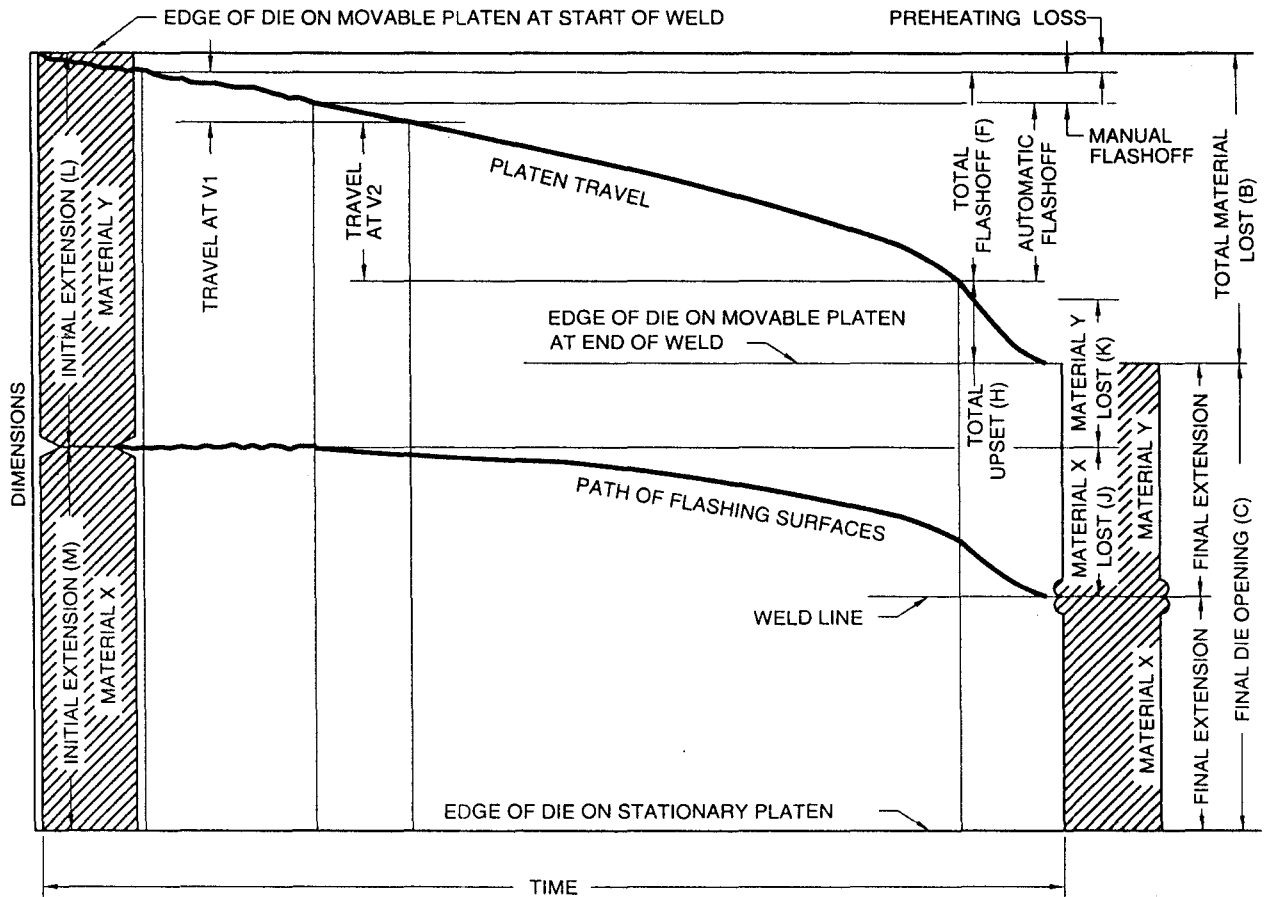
Flash Welding Dimensional Variables and Motions
